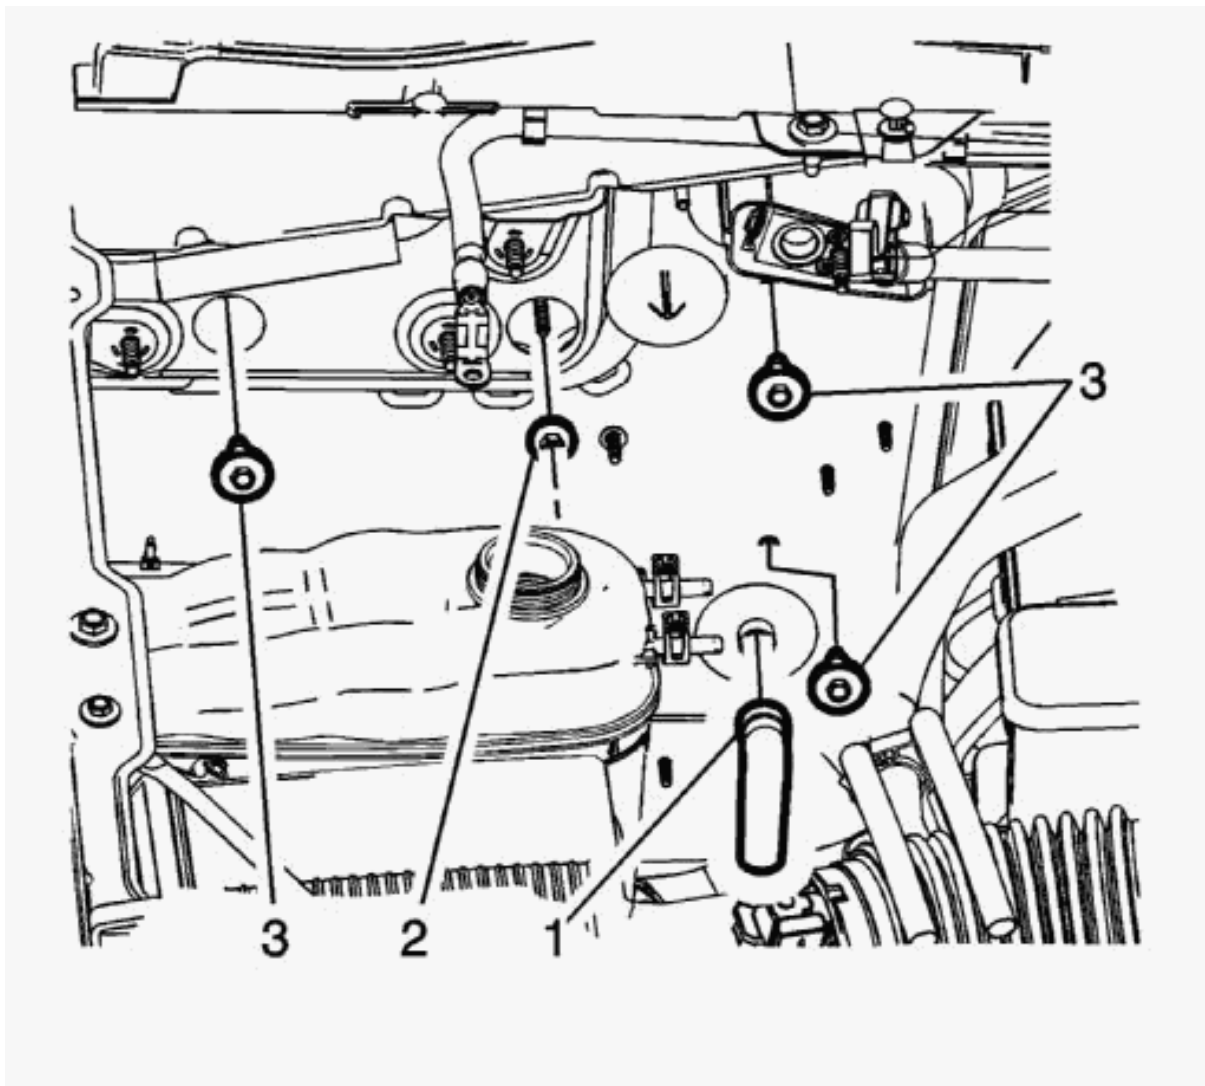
Air Conditioning Evaporator Case Drain Tube
